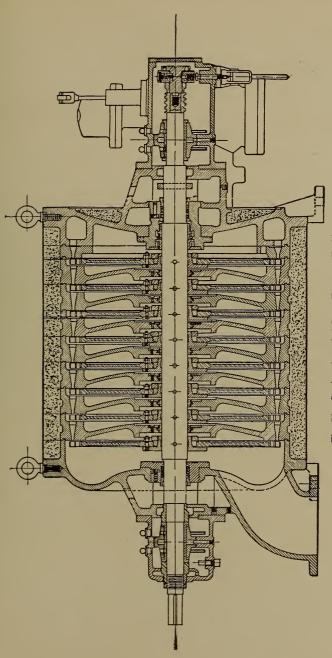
Section through 8-Stage Economy Turbine Courtesy of Kerr Turbine Company, Wellsville, New York
